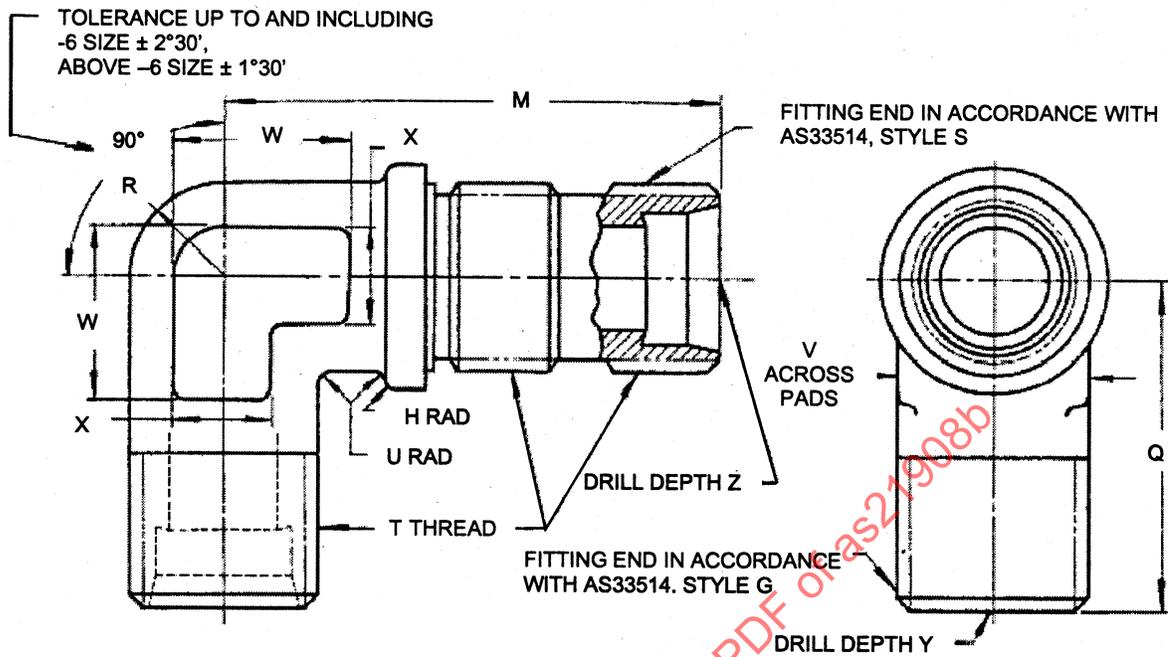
ELBOW, BULKHEAD UNIVERSAL 90°, FLARELESS TUBE
